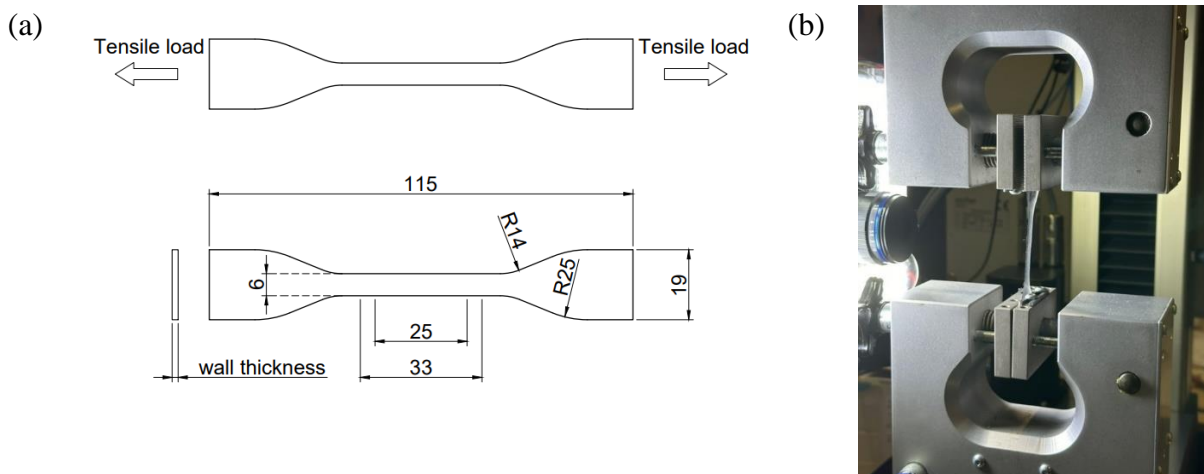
(a) Test specimens ASTM D638-IV (measures in millimeters). (b) Universal Testing Machine.
